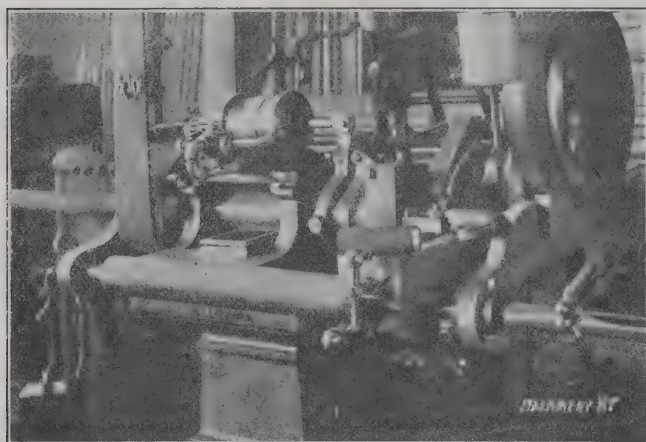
Machine for Cutting and Beveling Flue Repair Ends
